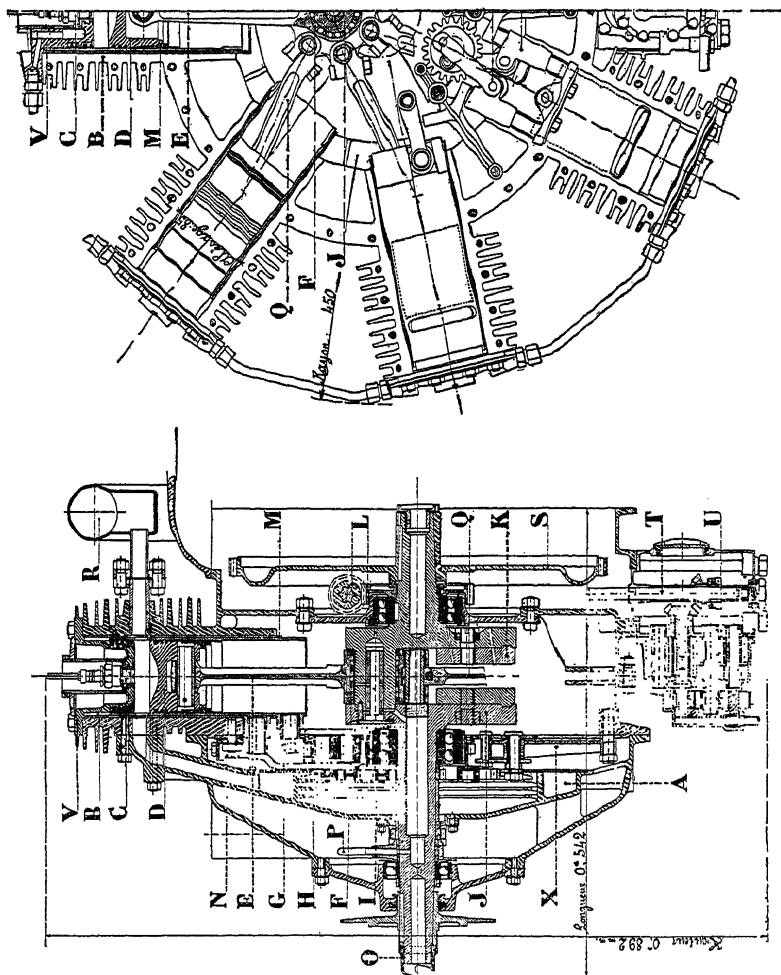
The Voisin double-sleeve valve seven-cylinder radial engine.
